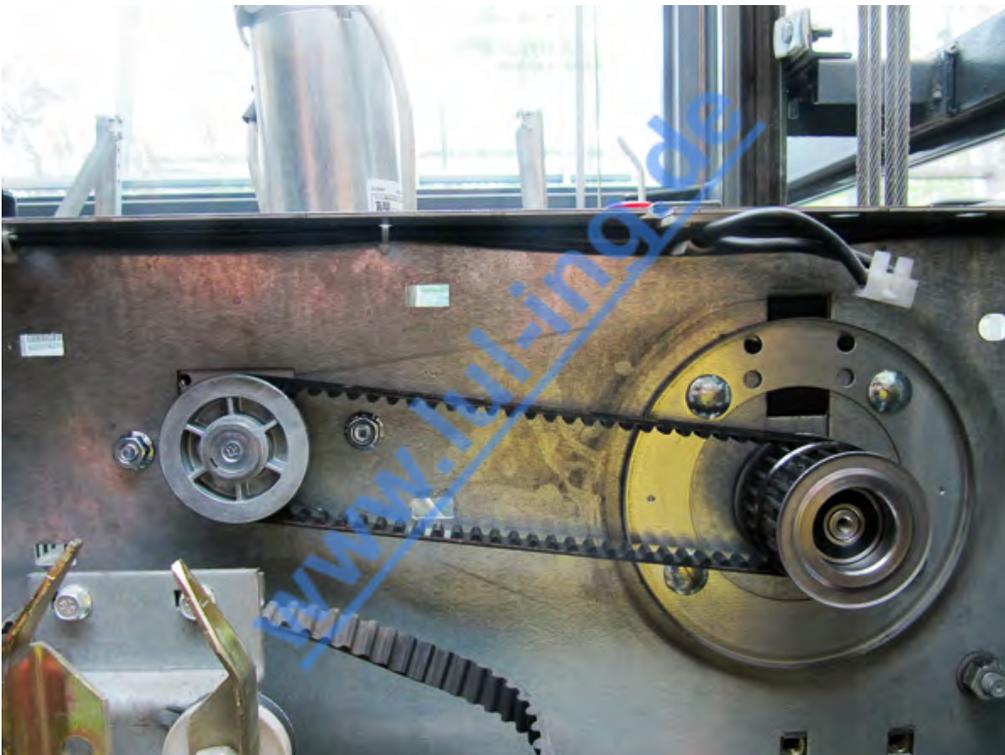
mounted TSG drive and replaced toothed belt to double toothed pulley
